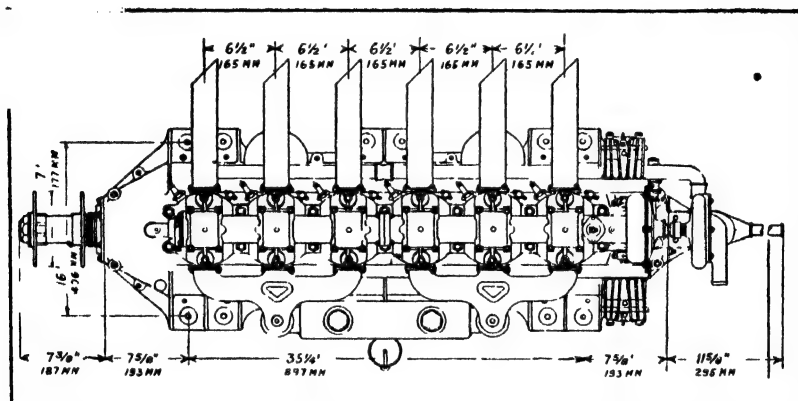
Plan View of Hall-Scott Type A5, 125 Horsepower Six-Cylinder Aviation Engine Showing Installation Dimensions.
